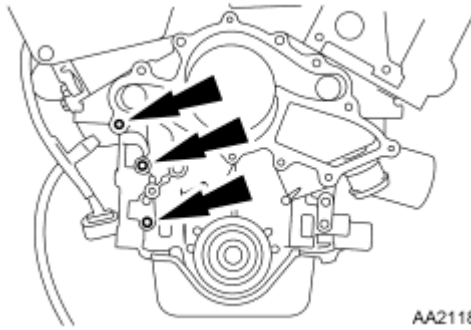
Apply Thread Sealant With PTFE On Bolts
